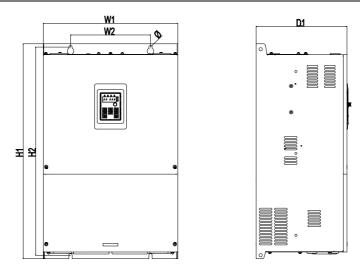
Wall installation diagram for 380V 75kW VFD models
